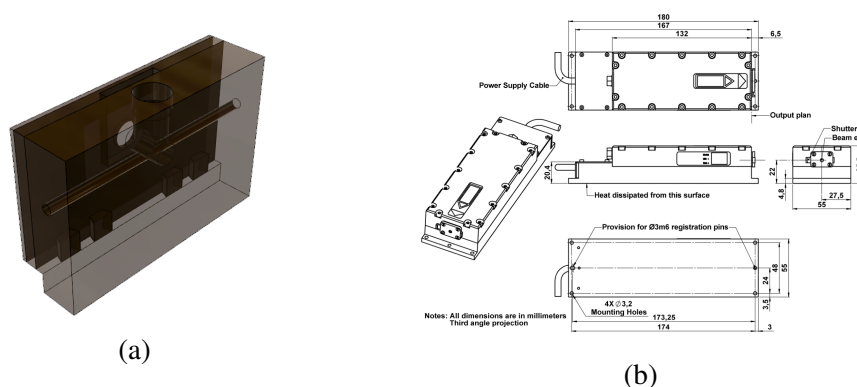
a) New flow cell that can be attached to the front of laser, the tubing is inserted horizontally and optic fibre on top. b) Technical drawing of the laser from manufacturers data sheet.
